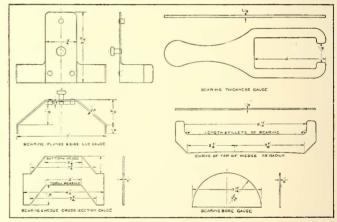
PROPOSED STANDARD BEARING AND WEDGE GAGES
